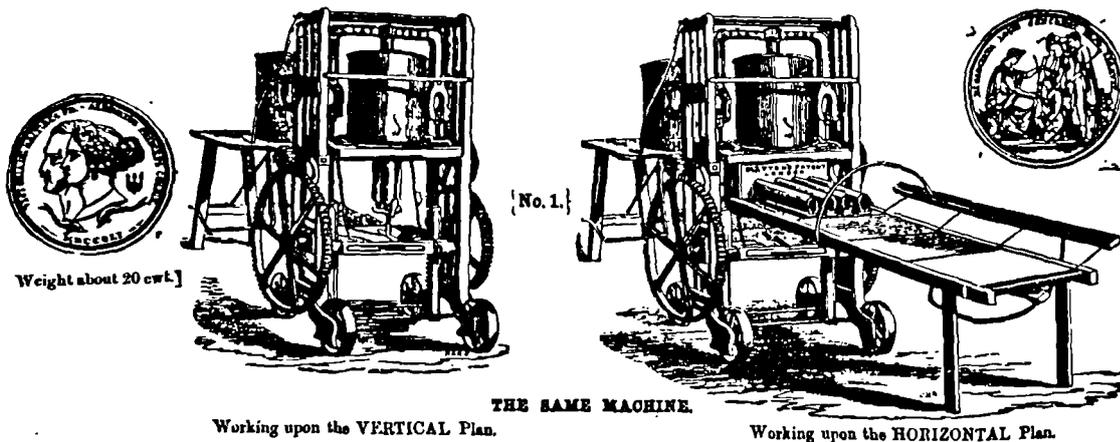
Henry Clayton's perpendicular piston machine, British Patent No. 10, 132, 1844. [Drawing enrolled with patent]
